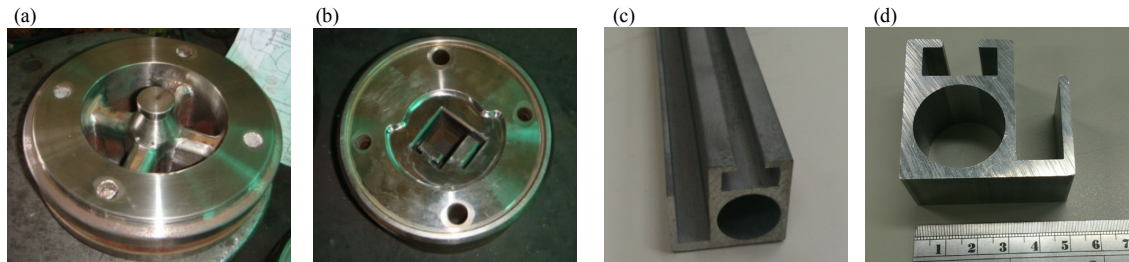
Die manufacture: (a) top view of upper die; (b) top view of lower die. (c) hollow extrusion product and (d) cross section.
